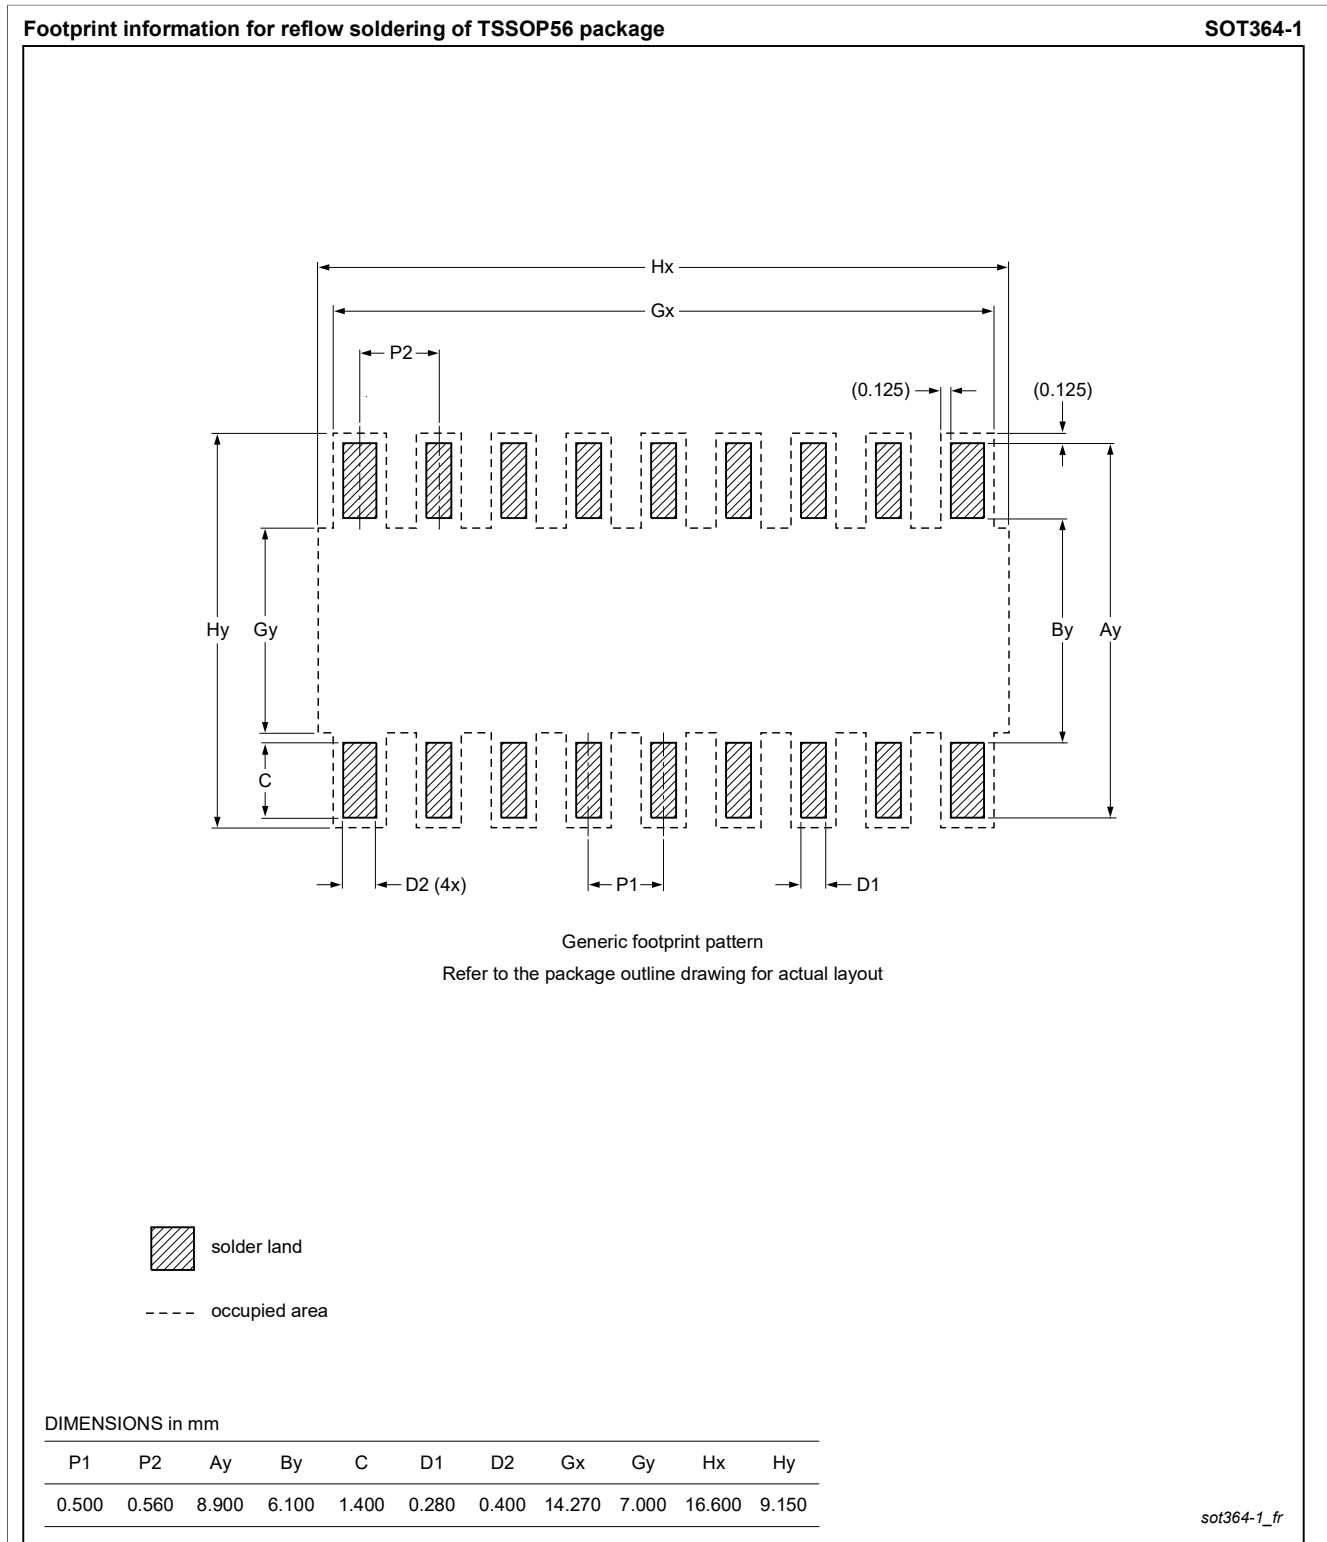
Footprint information for reflow soldering of SOT364-1 (TSSOP56) of PCF85176T
